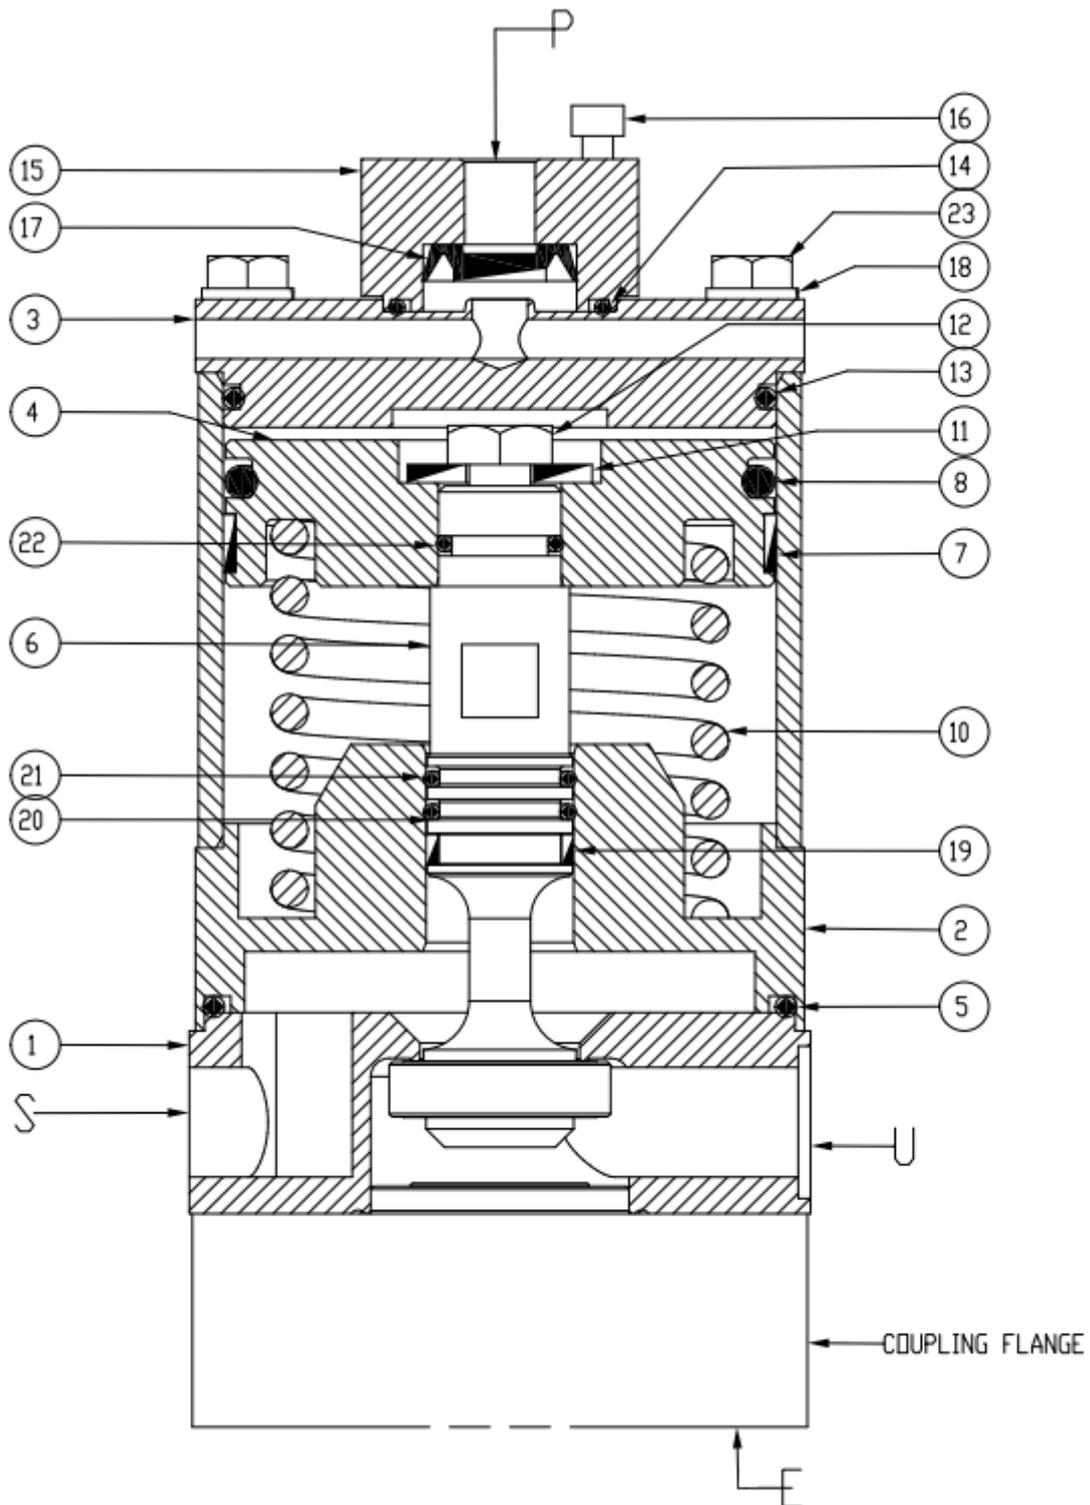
CO 3 way pneumatic valve size 1" ½: stainless steel machining
